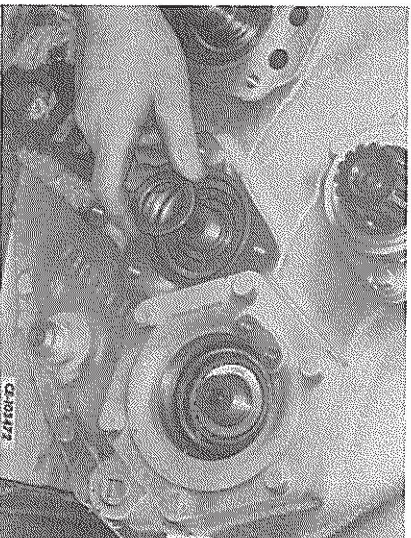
Removing the Spline Shaft Front Bearing Plate
